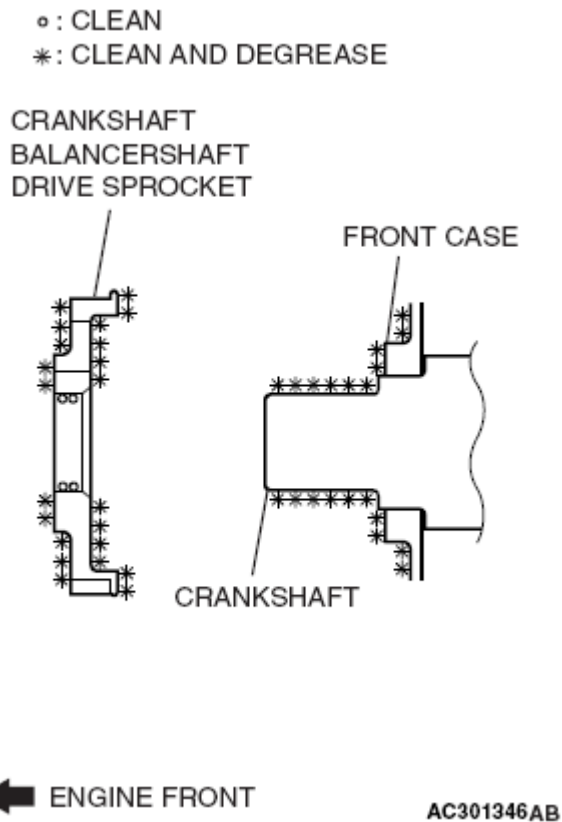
Crankshaft Balancer Shaft Drive Sprocket Cleaning Area
